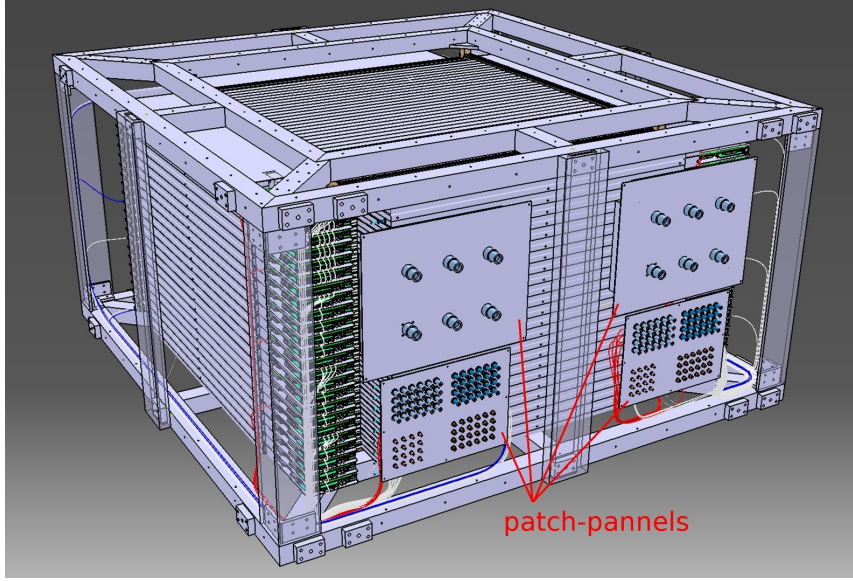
CAD drawing of the EMR detector. The external protective panels are not shown.
